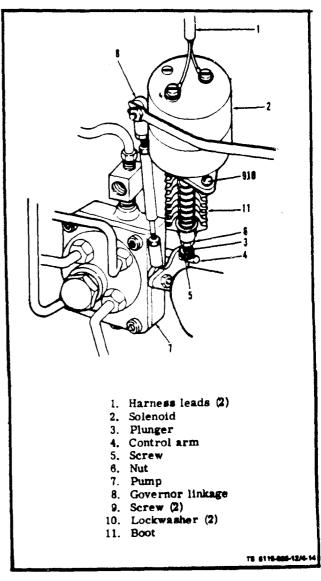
Adjusting Fuel Shut_Off Solenoid
